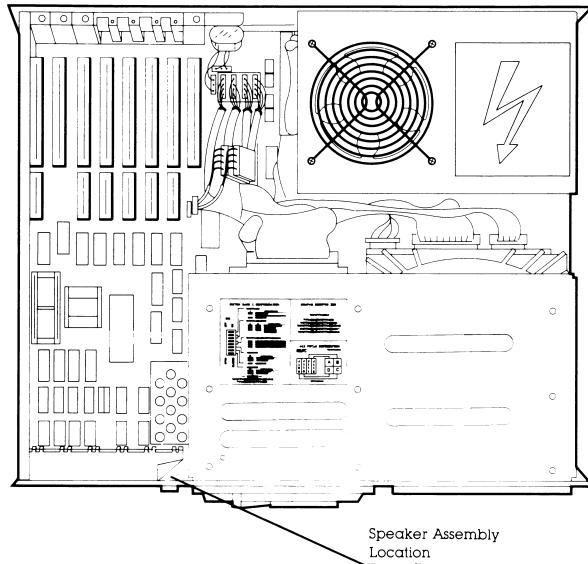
Location of the Speaker/Board Guide Assembly.
